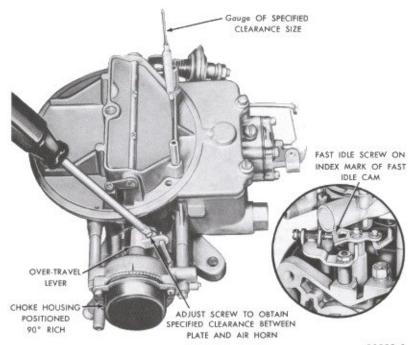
Vacuum Piston Choke Plate Clearance (Pull-Down)
